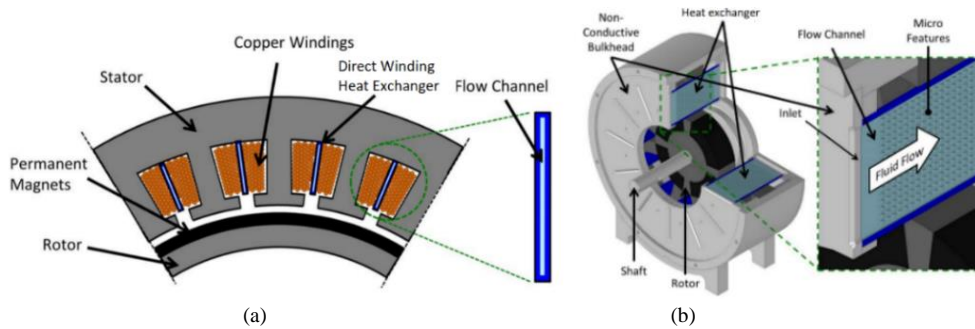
(a) Direct winding heat exchanger placed between winding, (b) machine prototype [Sem_14]
